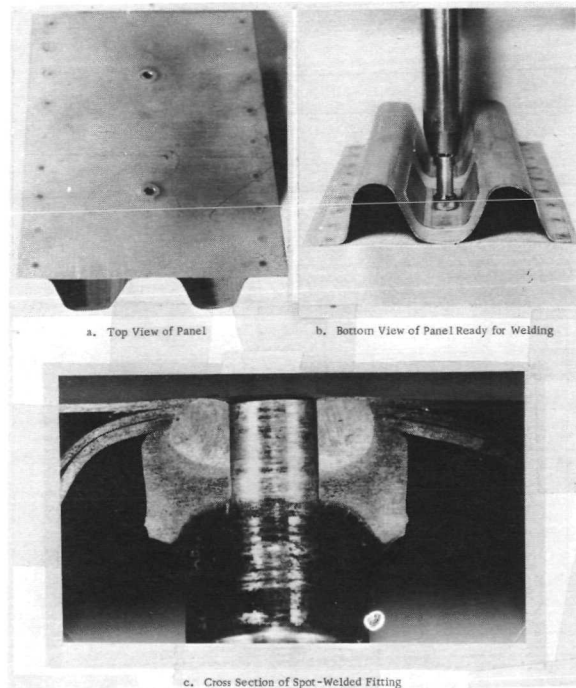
M-252 port-fitting attachment spot-welded to a three-ply pileup of René 41.
